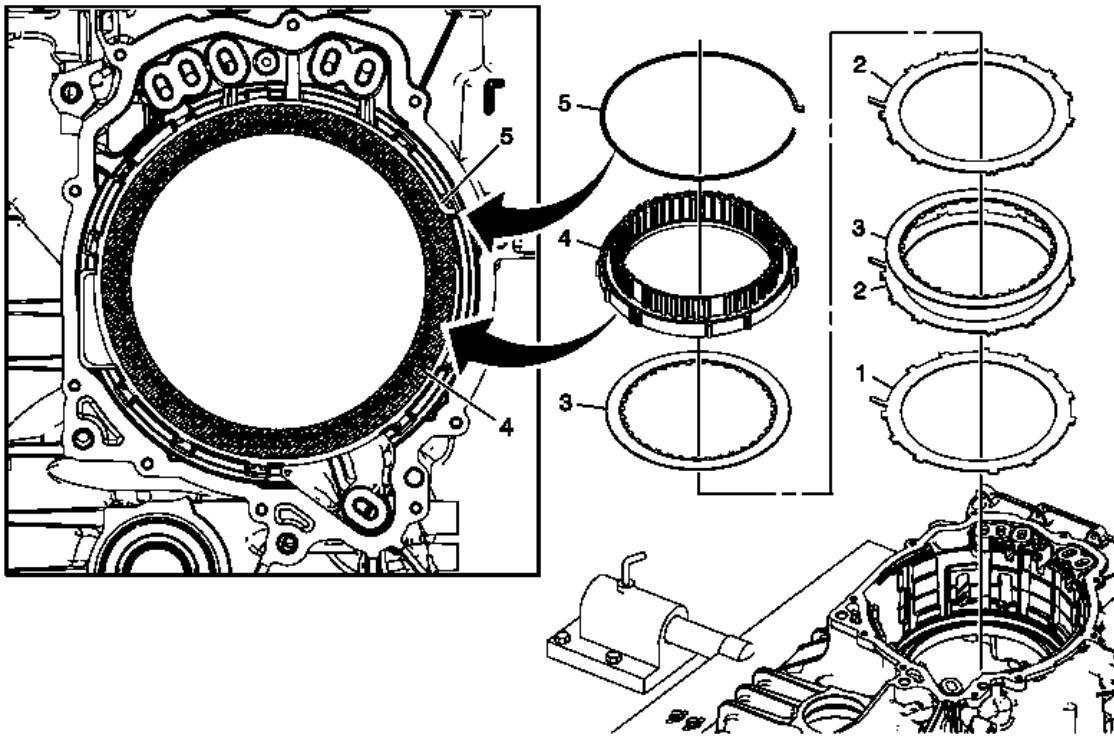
Identifying 1-2-3-4 Clutch Plates & Low Reverse Clutch Installation Order
